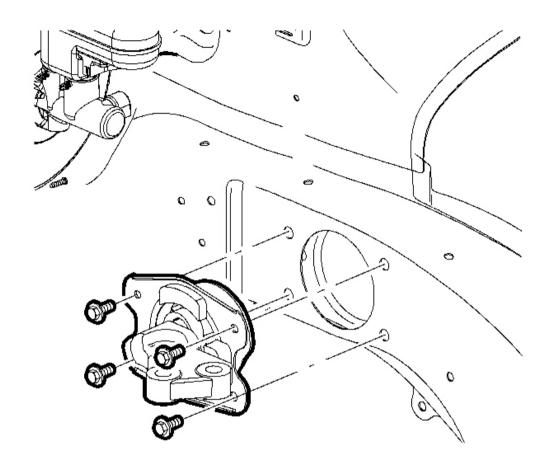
Left Transmission Mount & Side Rail Bolts Courtesy of GENERAL MOTORS CORP.
